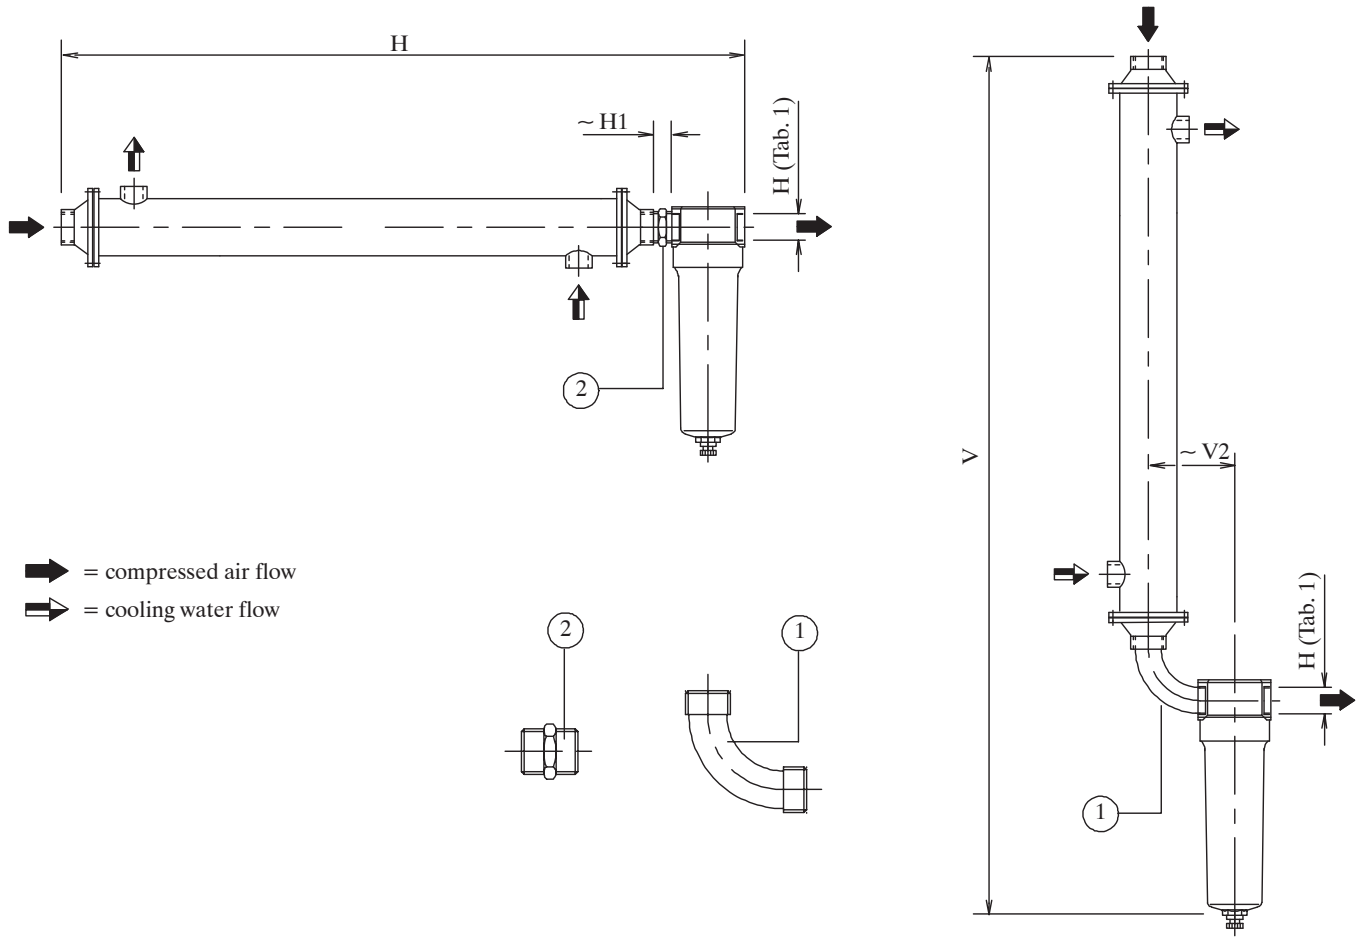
Combined Aftercooler (WFN009) + Separator (STH)
